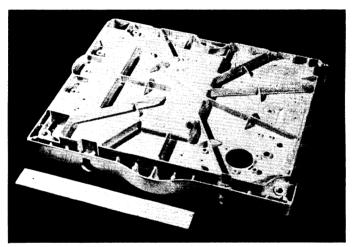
Base for a mechanical scale cast of S9 aluminum alloy. Note the well-rounded edges, liberal fillets, and large radii used at all intersections. Dies for such parts are easier to machine and part breakage is less than if the corners were sharp.
